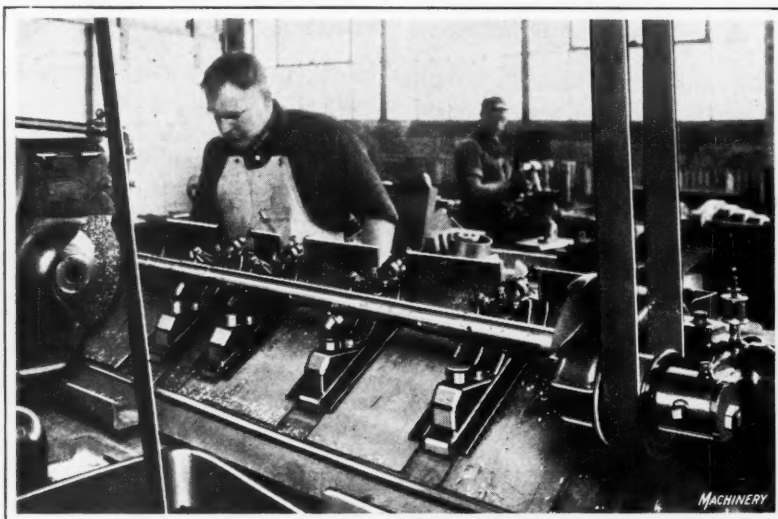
Grinding the Bar and the Guide Strips on a Cylindrical Grinding Machine
